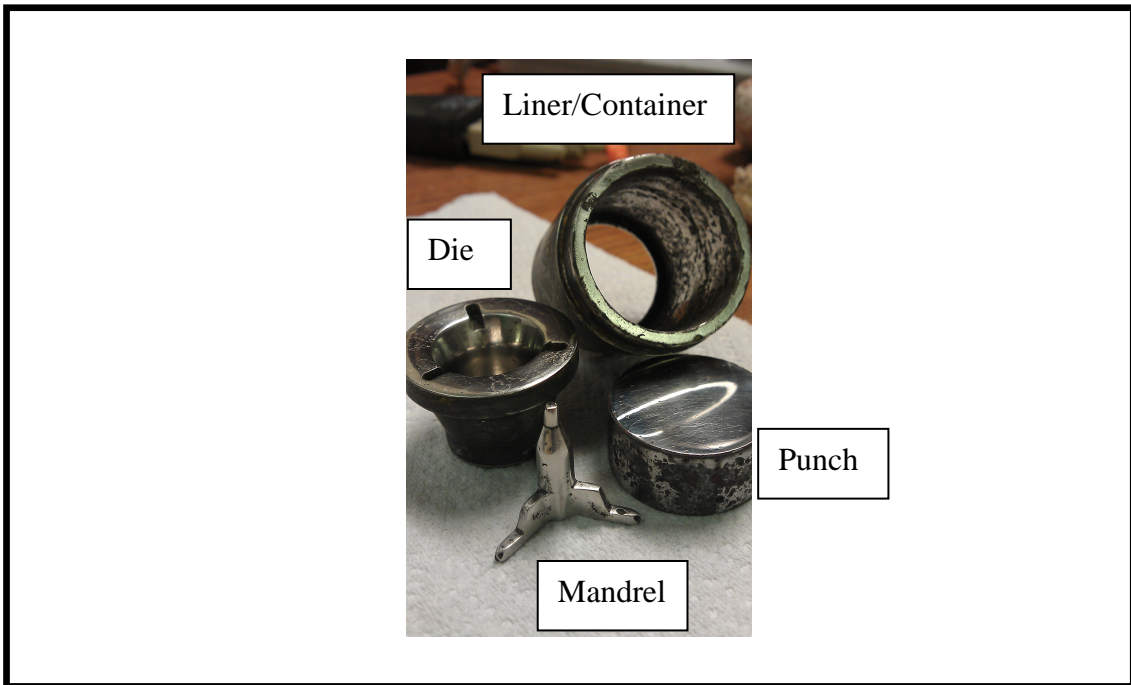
Extrusion die assembly exhibiting the surface finish/friction conditions
